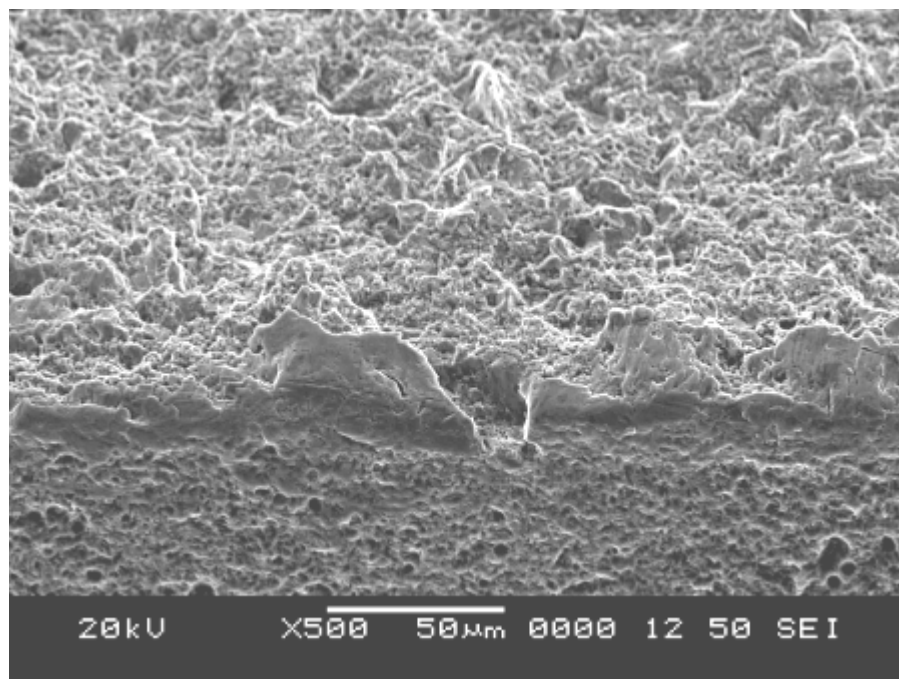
Tooth 4 drive side primary pit origin, gear fracture half.
